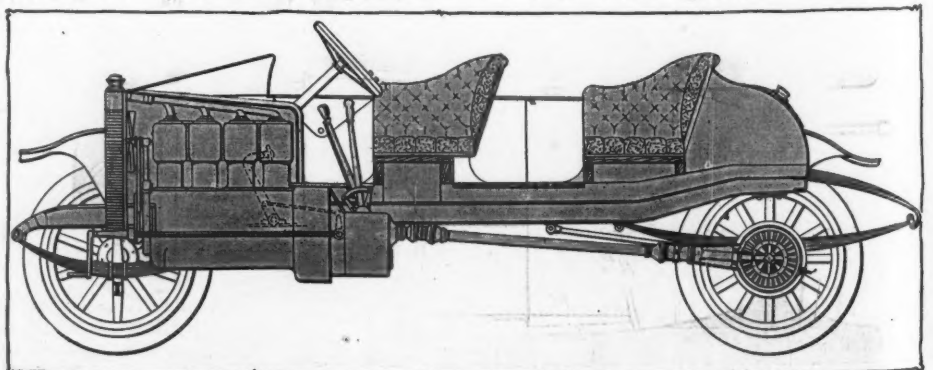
SIDE VIEW OF HUFFMAN HOODLESS CAR
